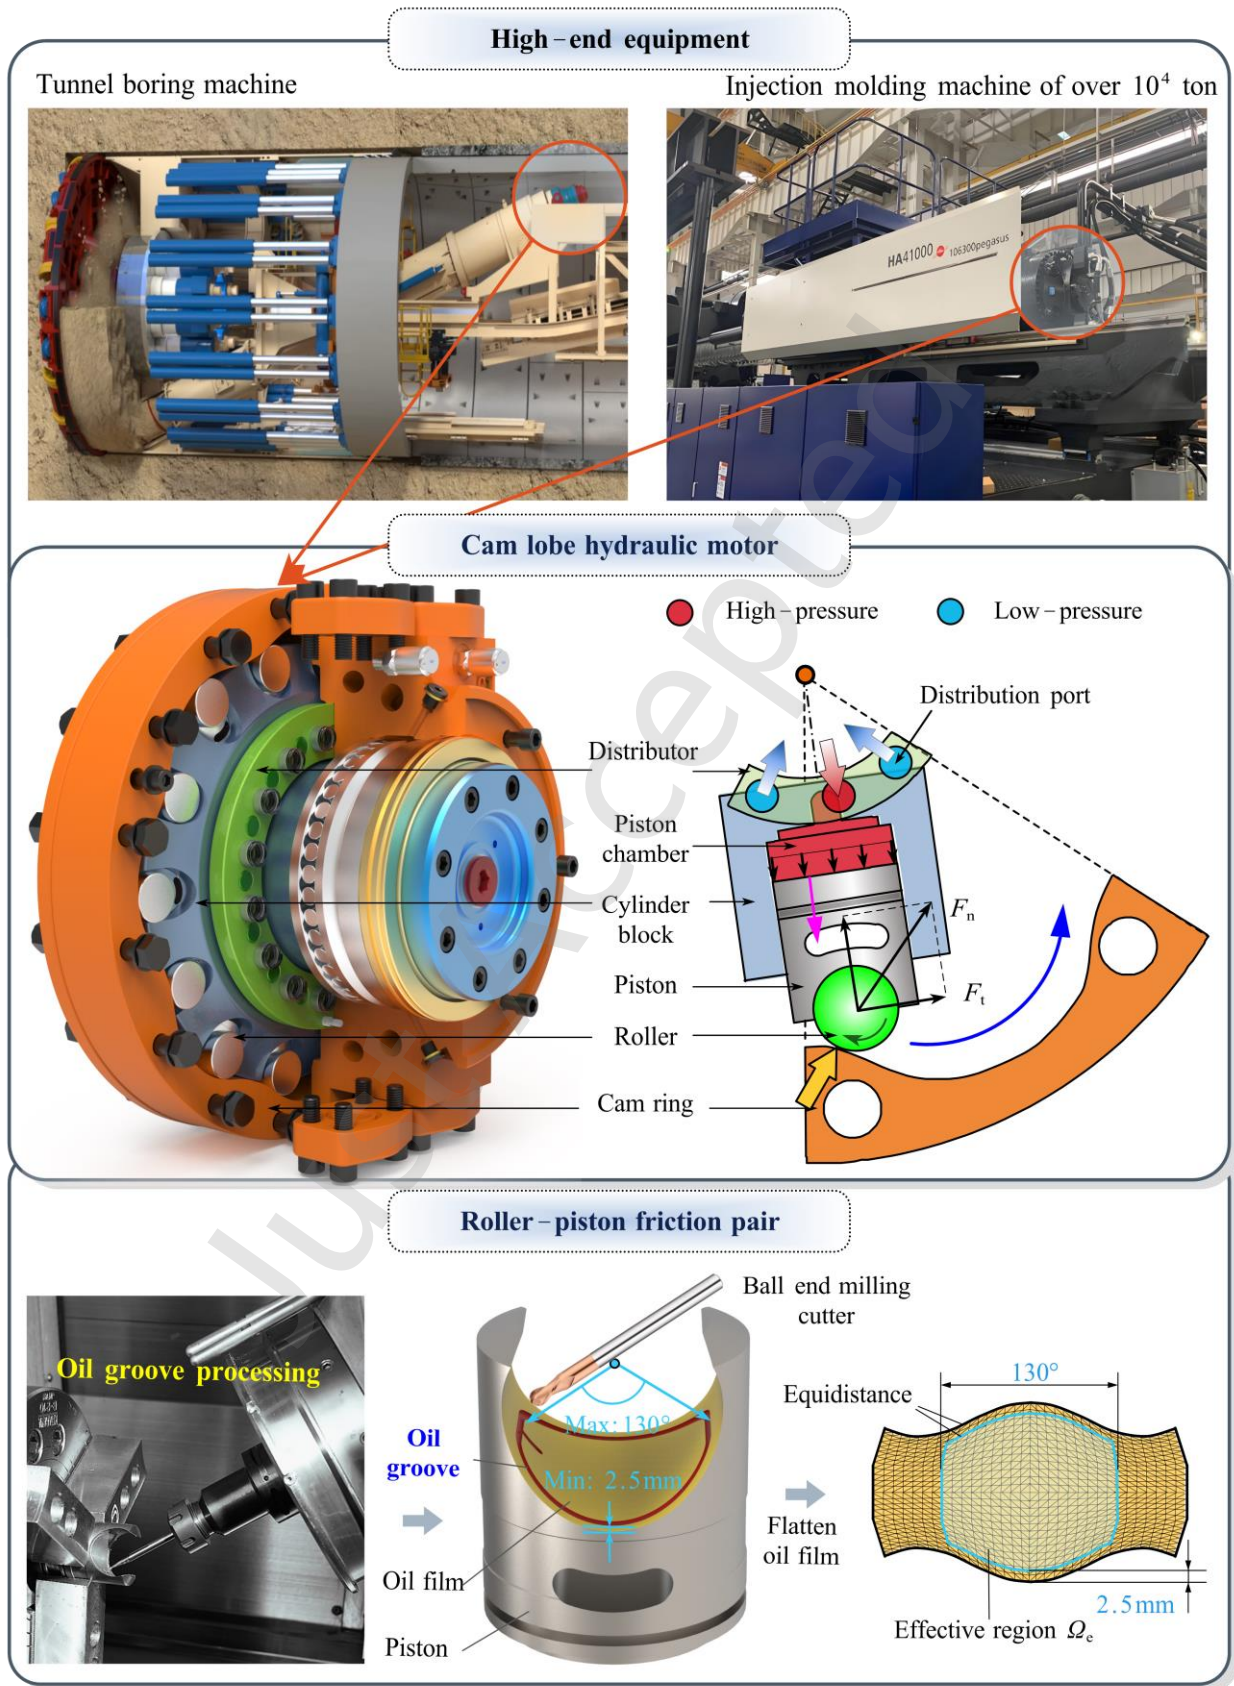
Oil groove on piston in CRM-HA 50 cam-lobe hydraulic motor and design constraints
